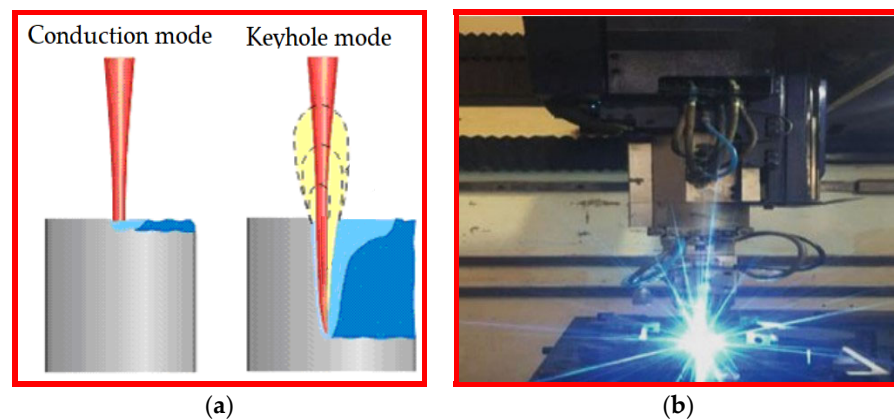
(a) Laser welding modes [26], (b) laser beam welding in progress [27].
